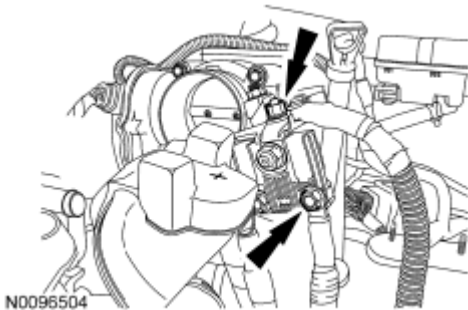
Locating Power Feed Wires From Battery Terminal & Nuts
